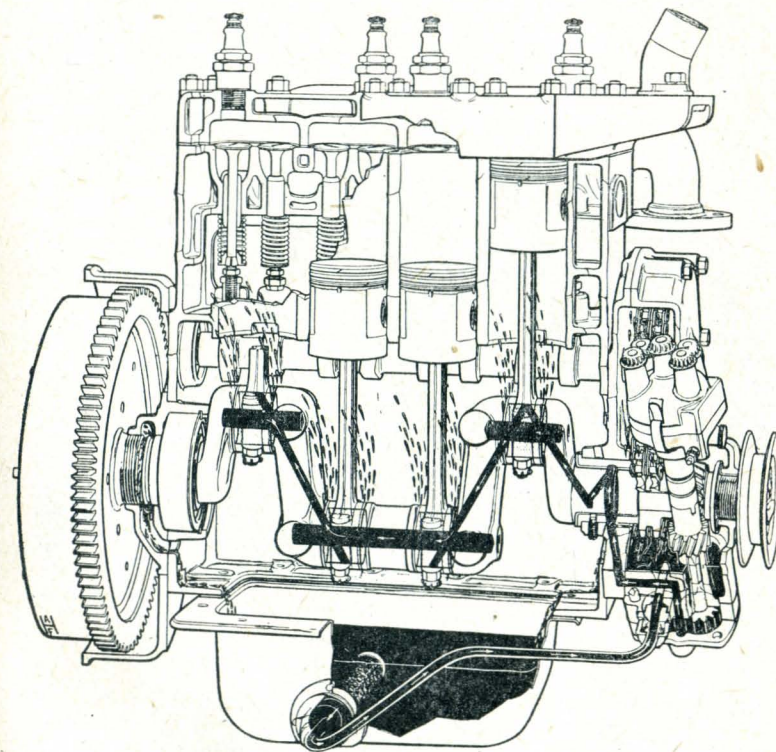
THE LUBRICATION CIRCUIT OF THE MINOR ENGINE
